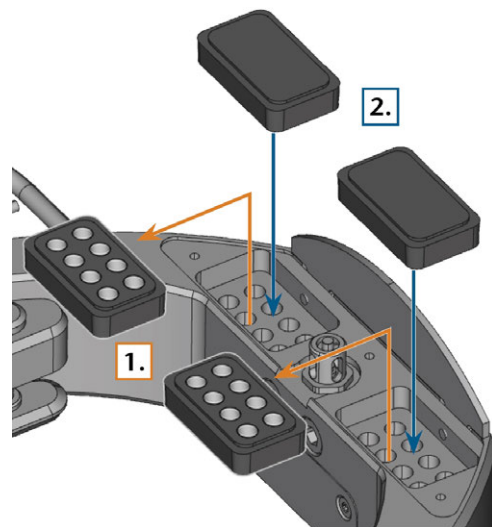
NEW TOOL MAGAZINE INSERTS (RIGHT, WITHOUT TOOL POSITIONS) REPLACE OLD INSERTS (LEFT, WITH TOOL POSITIONS)
